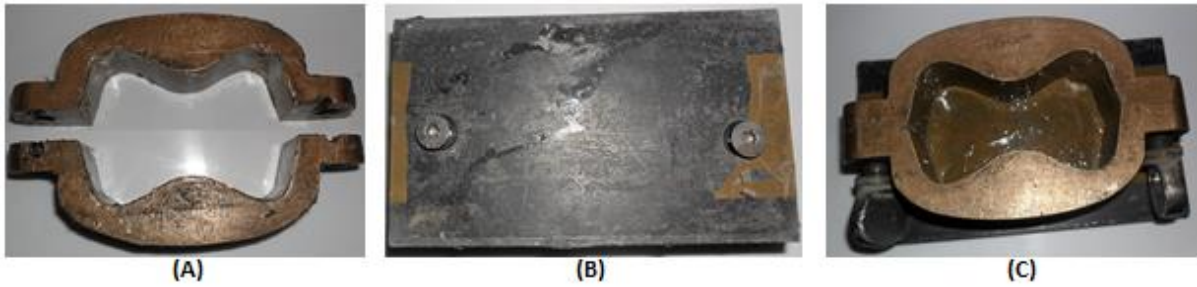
Mould composition. (A): Two halves dog bone shaped. (B): Base plate. (C): Mould.
